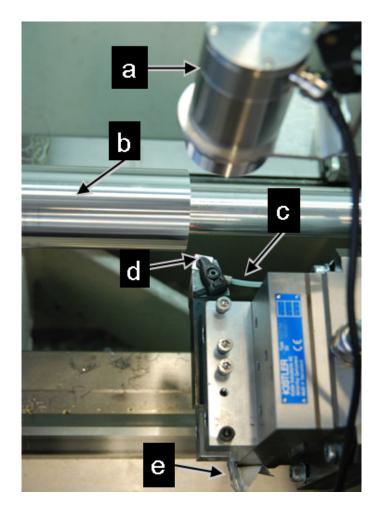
Experimental set-up of the internally-cooled tool on the CNC lathe: (a) pyrometer, (b) work-piece, (c) coolant outlet, (d) cutting tool, (e) coolant inlet.
